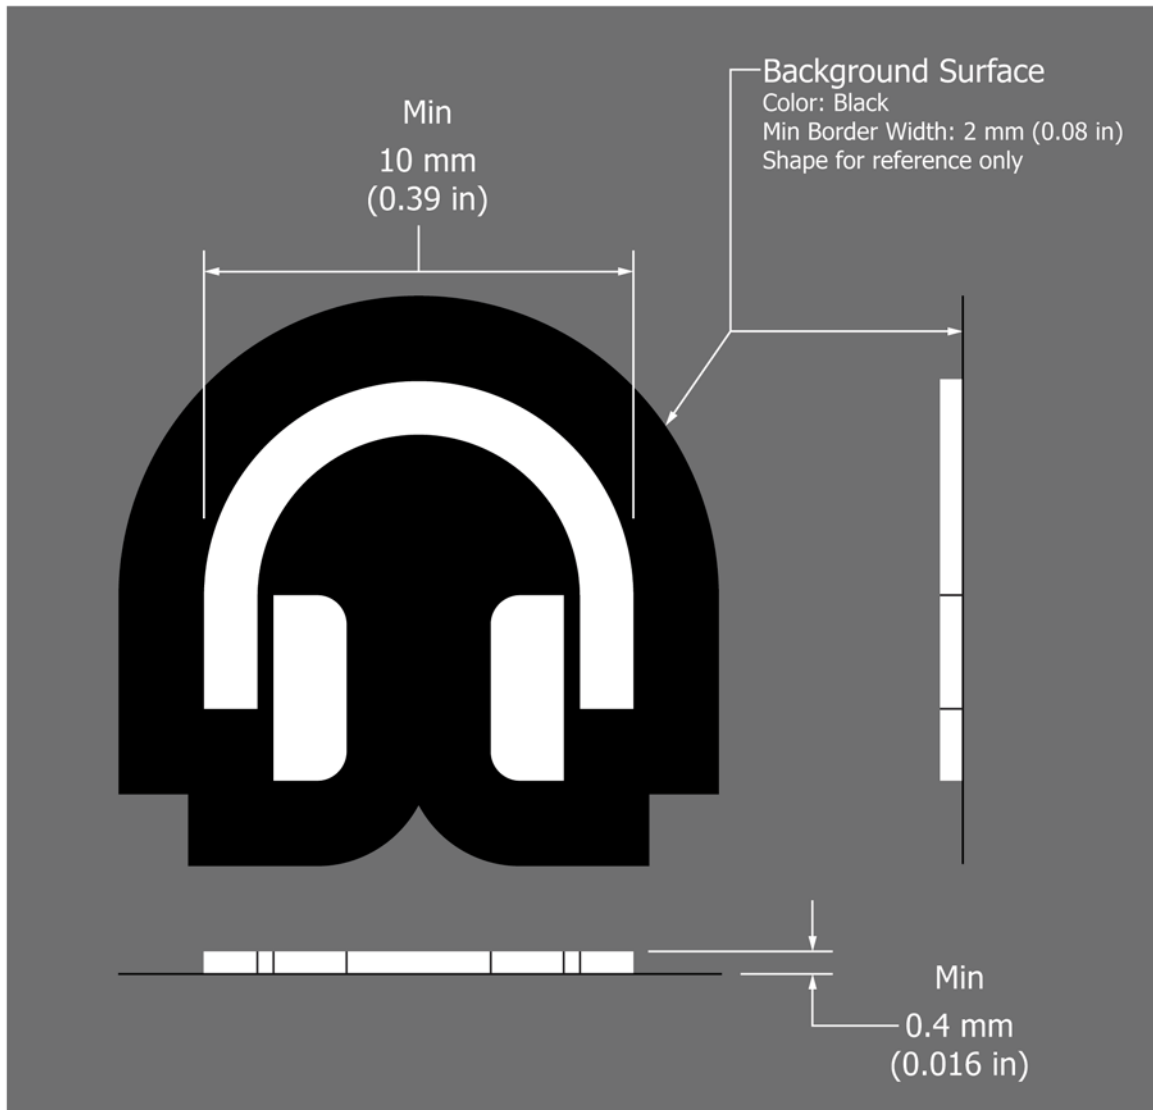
Headphone Jack (Socket) Symbol and Dimensions
